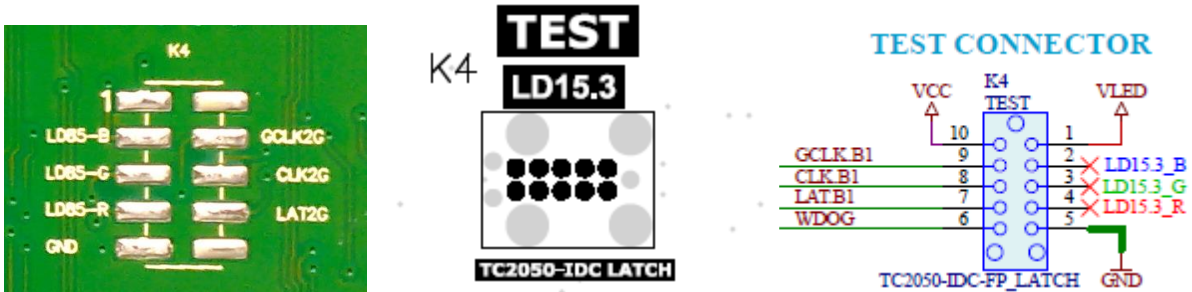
Test socket (left) and test socket on V18 boards (pictures on the right)
